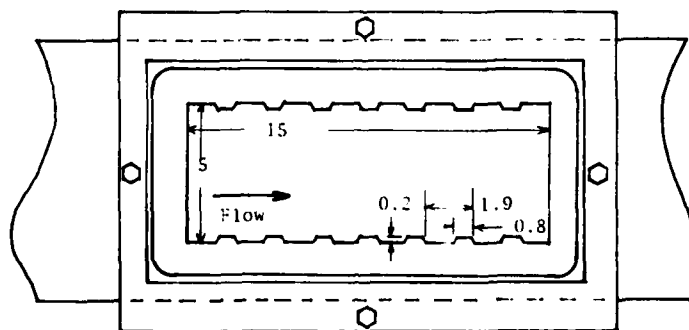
OPTICAL PORT IN TEST SECTION (DIMENSIONS IN CENTIMETERS)
